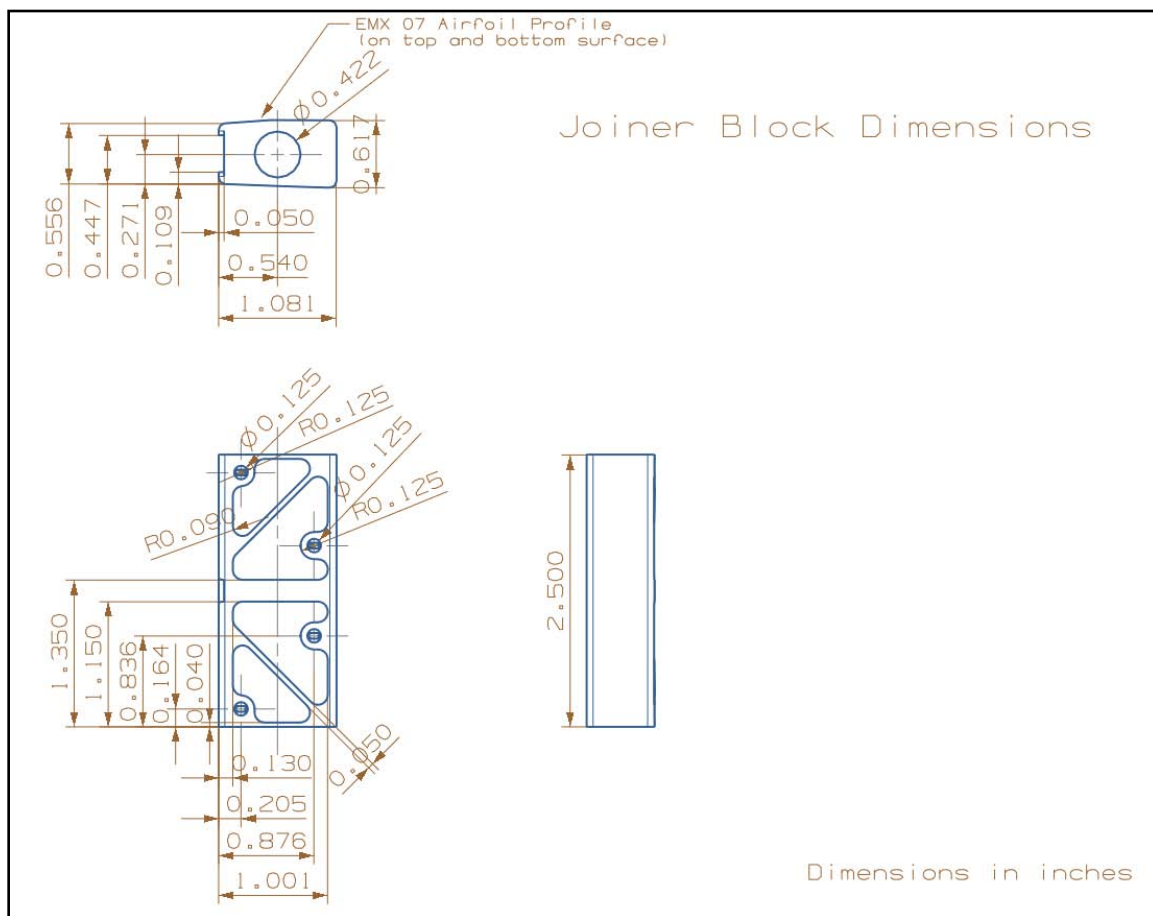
Three-view diagram of aluminum joiner block with dimensions
